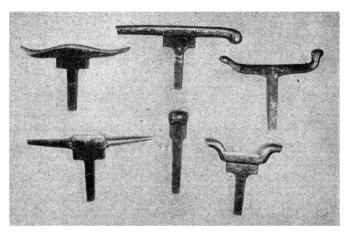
Metal stakes used in bending, forming, raising, and planishing.
